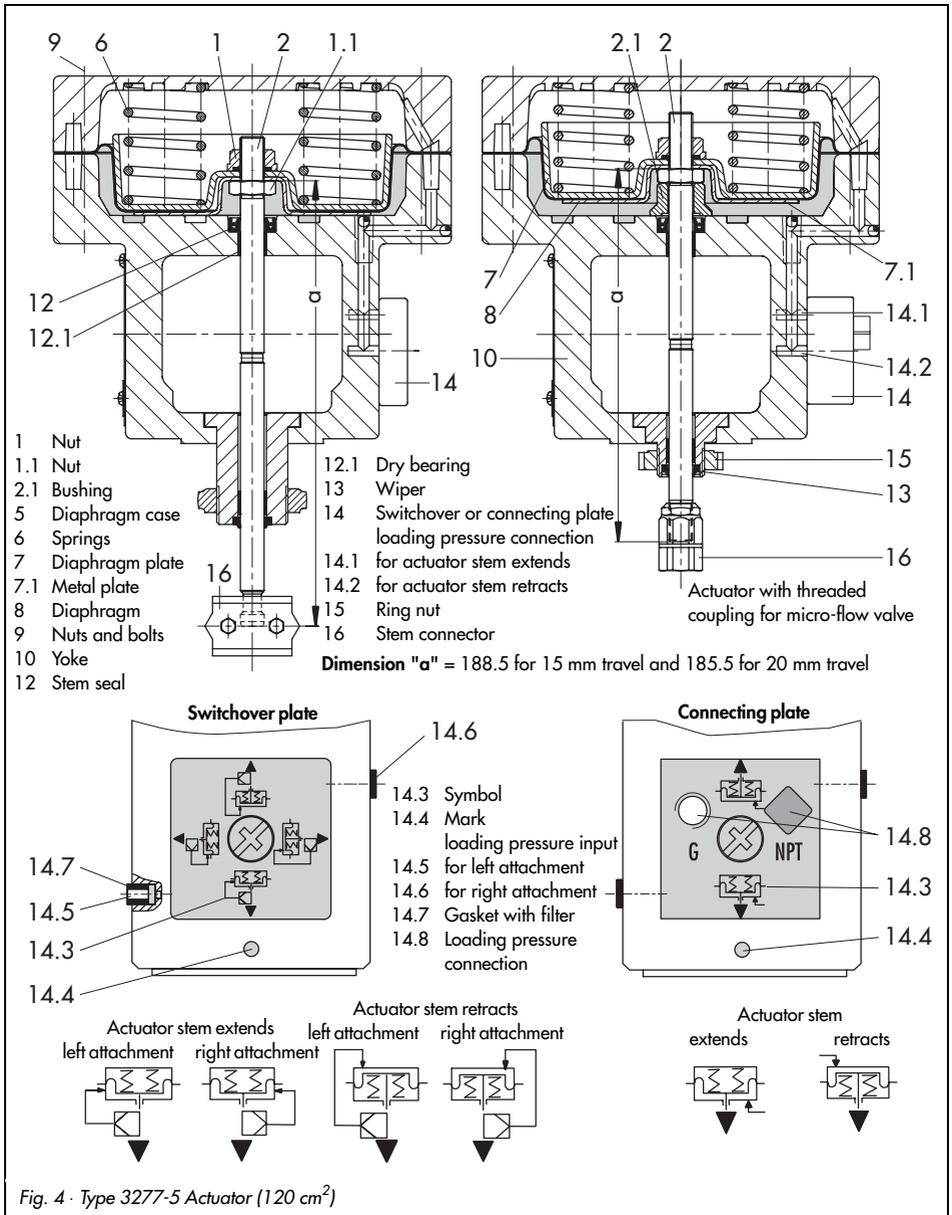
Type 3277-5 Actuator (120 cm²)
